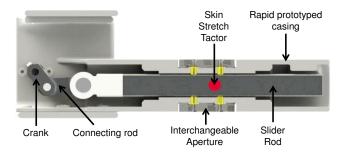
Section cut of the skin stretch stylus. The device consists of a 4-bar crank-slider mechanism enclosed in a rapid prototyped casing.
